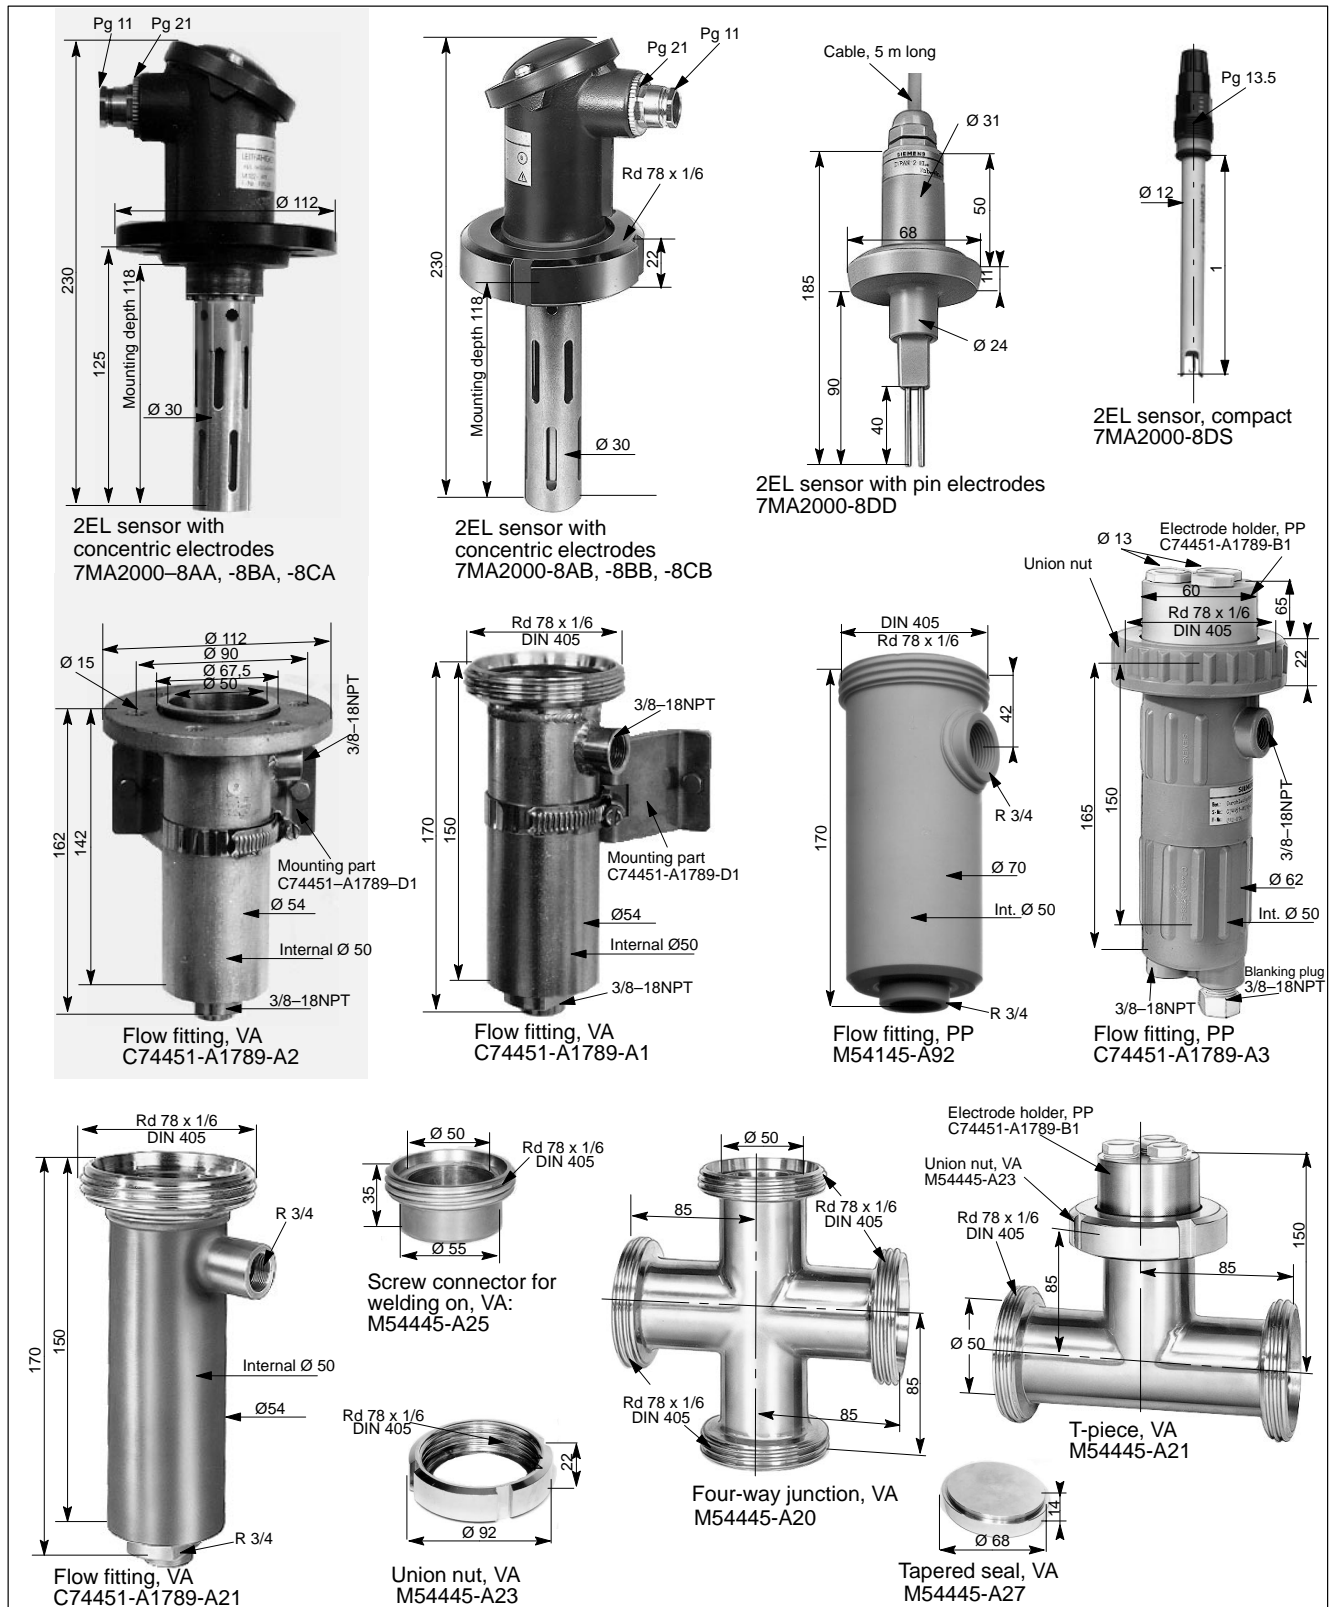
/21 2EL sensors, fittings and accessories, dimensions in mm
